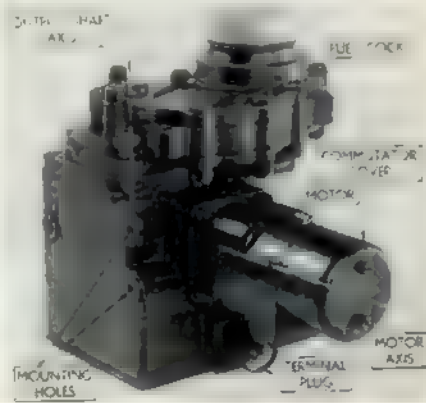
Rotary actuator fitted to a Vickers Type R 1 1/2-in.-bore fuel cock.
